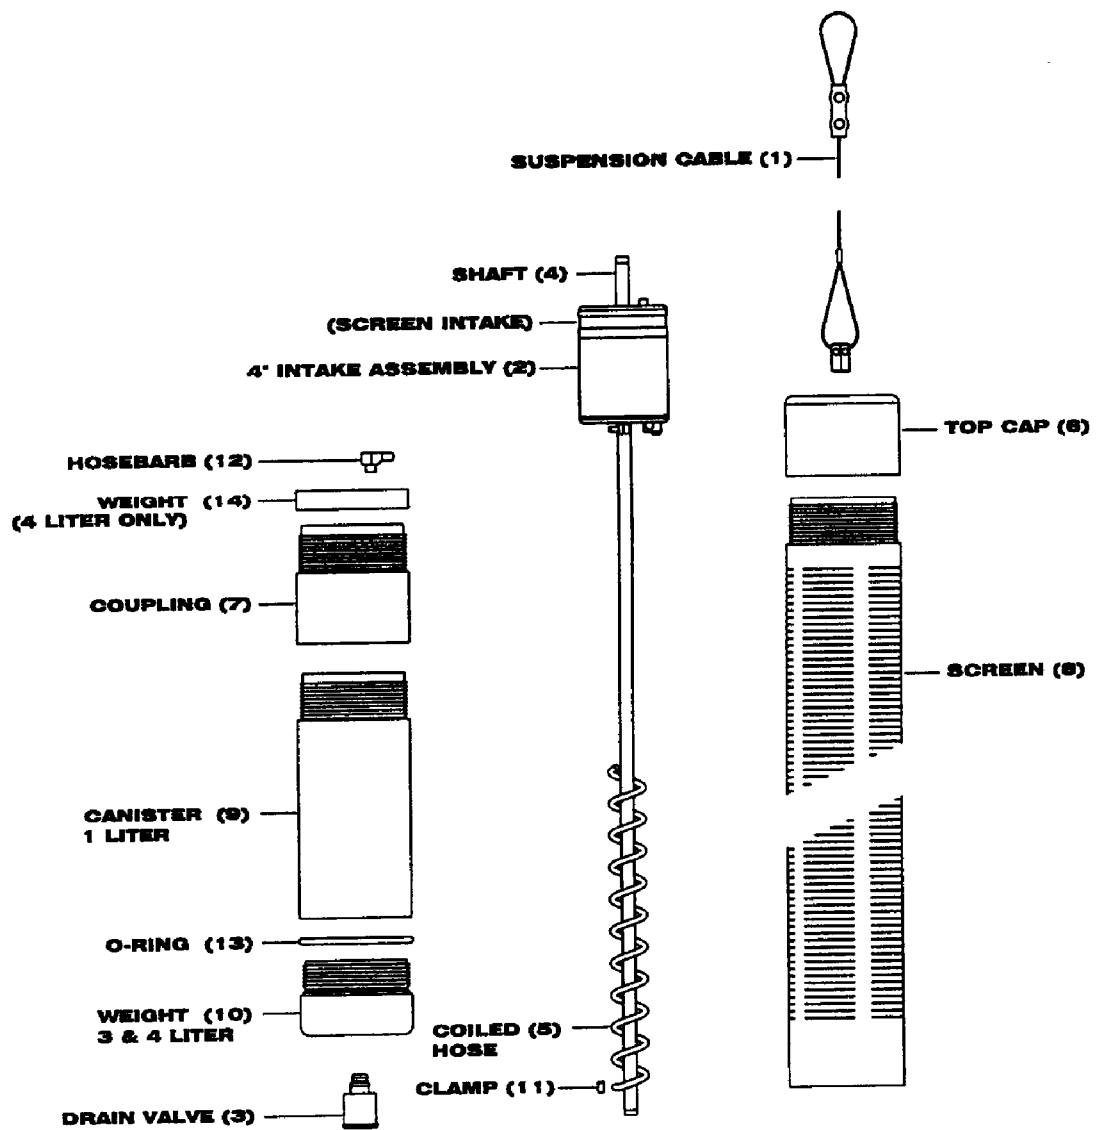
Standard 4" PRC Skimmer Assembly (3&4 Liter) Parts List
